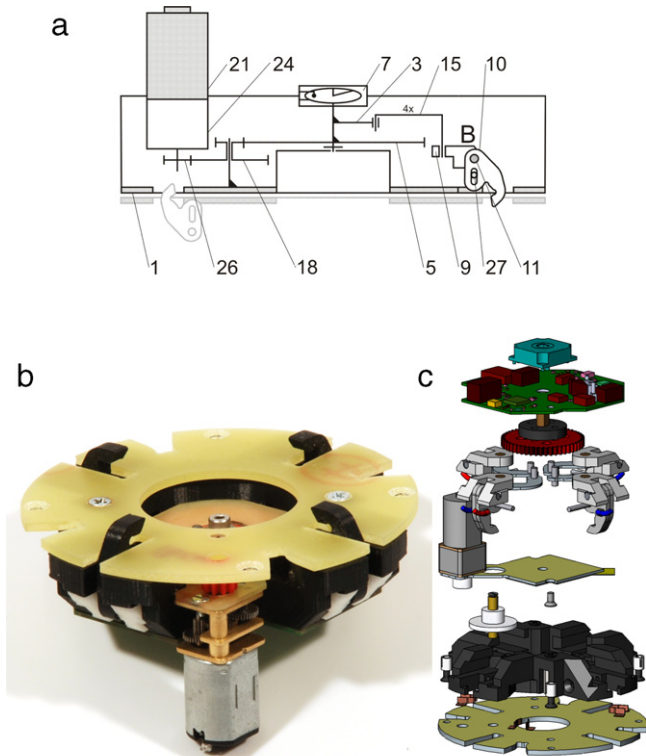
Roombots (RB) active connection mechanism (ACM). (a) Schematic presentation of its mechanical gear train. (b) Photo of the real mechanism. (c) ACM explosion view.
